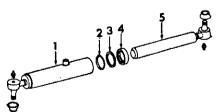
Exploded view of a single acting cylinder used on Series 424, 444, 2424 and 2444 equipped with standard adjustable front axle or heavy duty non-adjustable front axle.
